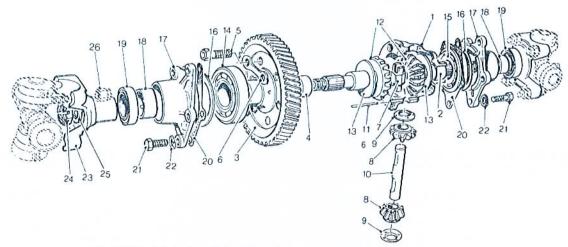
Exploded view of the differential assembly - manual transmission (Sec 1)
